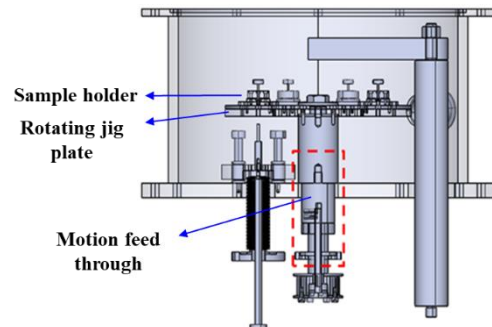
Detailed design of the rotary jig system within the test cryostat.
